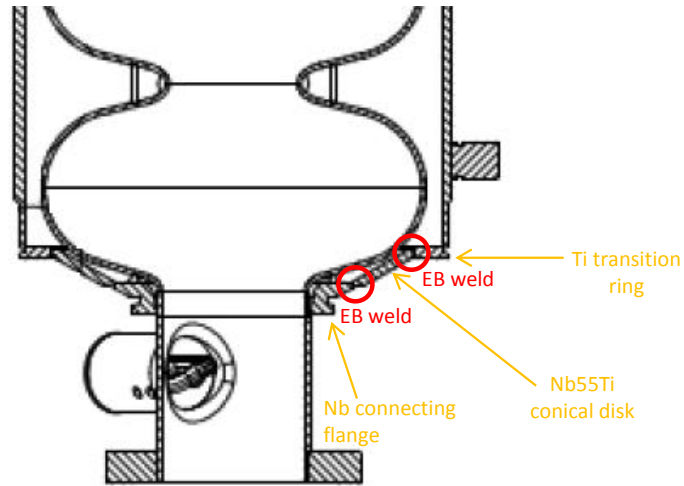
Extremity of a dressed TESLA cavity showing the weld joint geometry [14].
